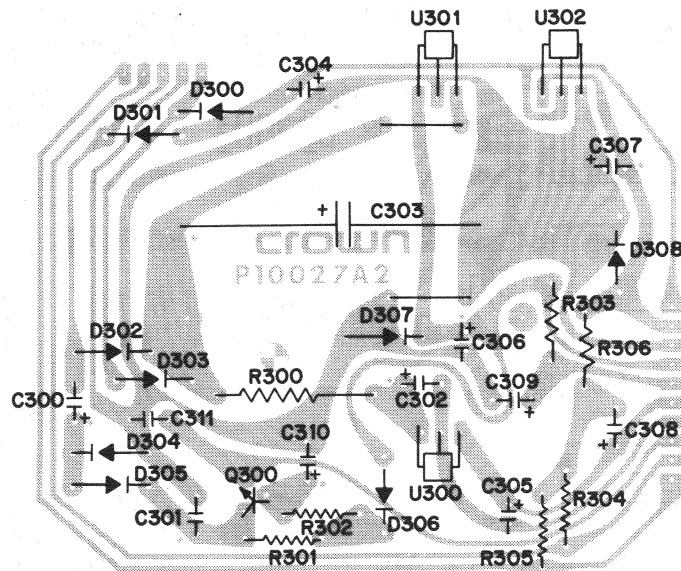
Power Supply Foil Board Layout; #Q42500-1
